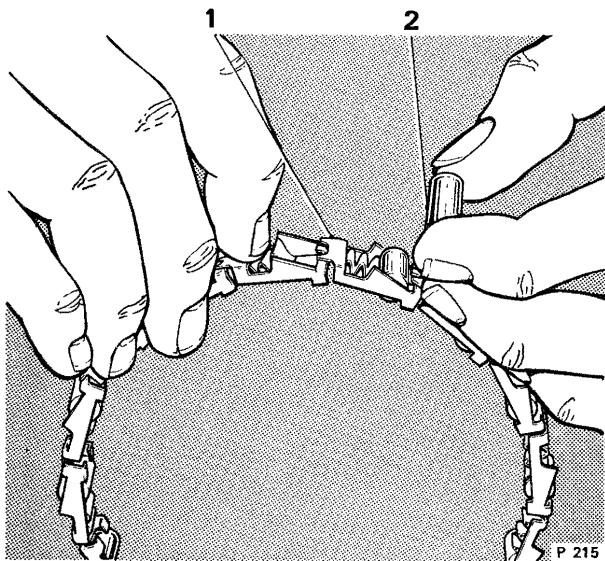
FITTING A ROLLER TO THE ROLLER CLUTCH CAGE (ROLLER CLUTCH)
